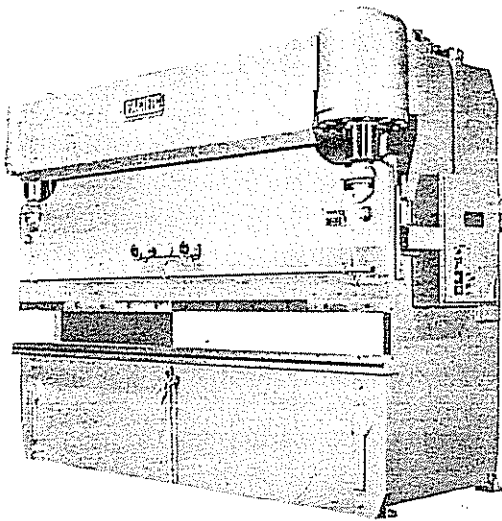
Press brake (courtesy Pacific Press and Shear).
